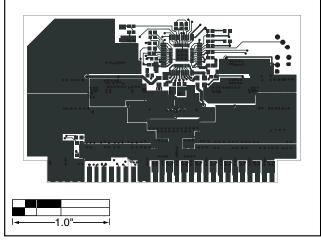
MAX5037 EV Kit PC Board Layout—Component Side
